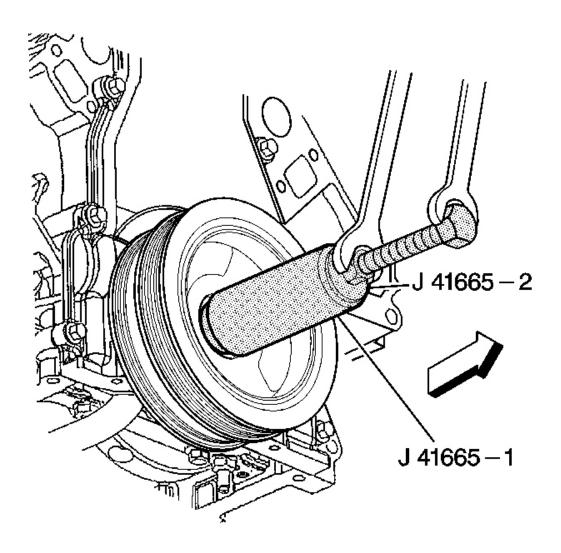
Installing Balancer Using J 41665 Courtesy of GENERAL MOTORS CORP.
